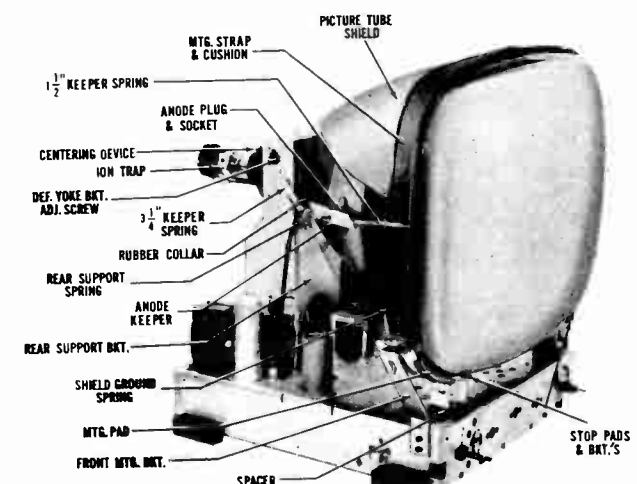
B. 20 or 21" Glass Pix Tube Mounting
